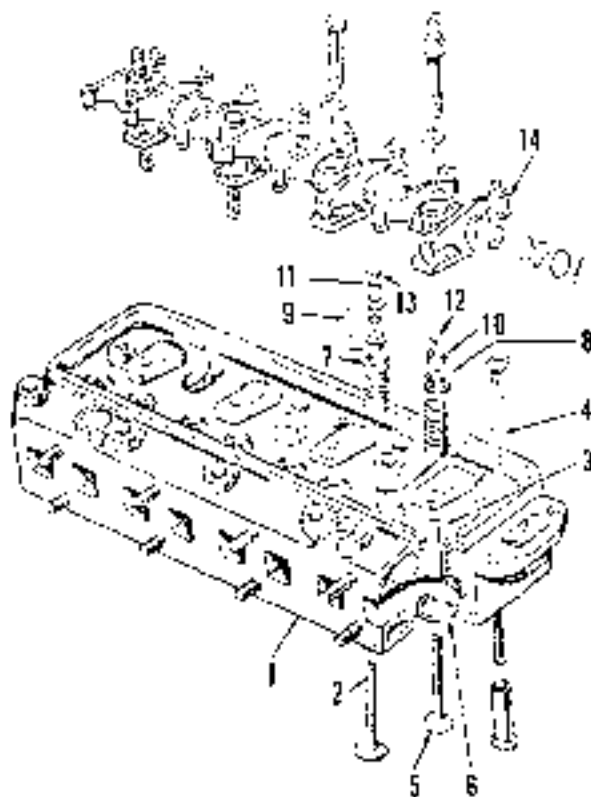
Exploded view of cylinder head. Rocker arms should be assembled with offset as shown in Fig. 36.
